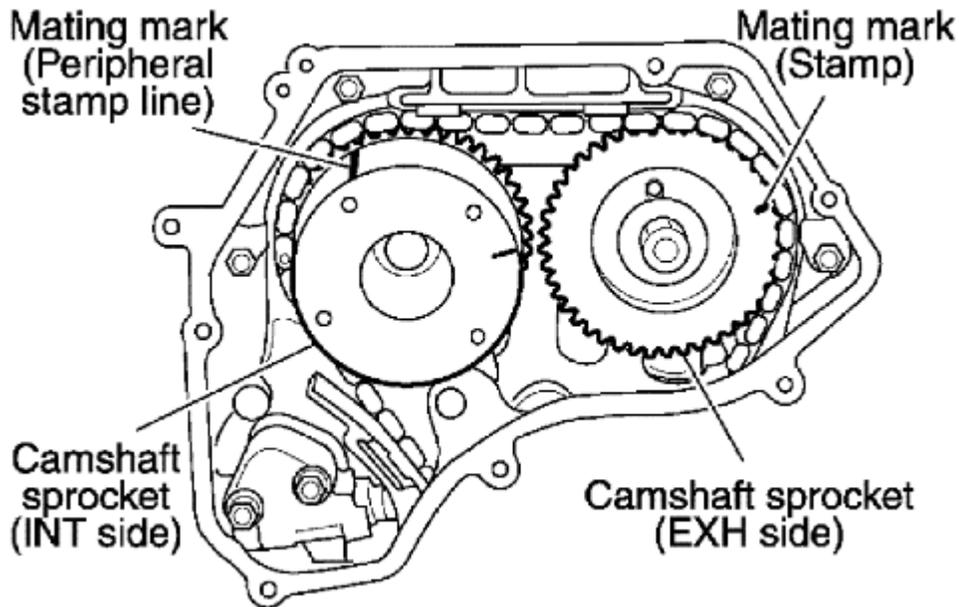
Identifying Mating Marks On Camshaft Sprockets
